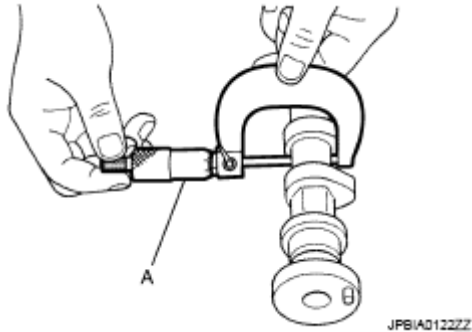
Measuring Outer Diameter Of Camshaft (EXH) Journal
